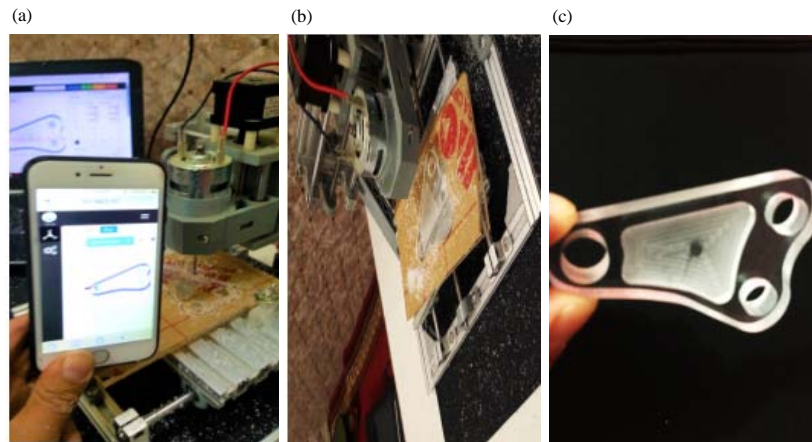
Manufacturing process cycle: a) Web page; b) Tool path and c) Final product
